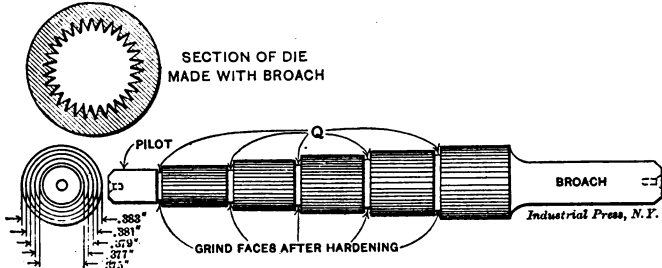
Broach for making Dies for Gear Blanks, etc.
